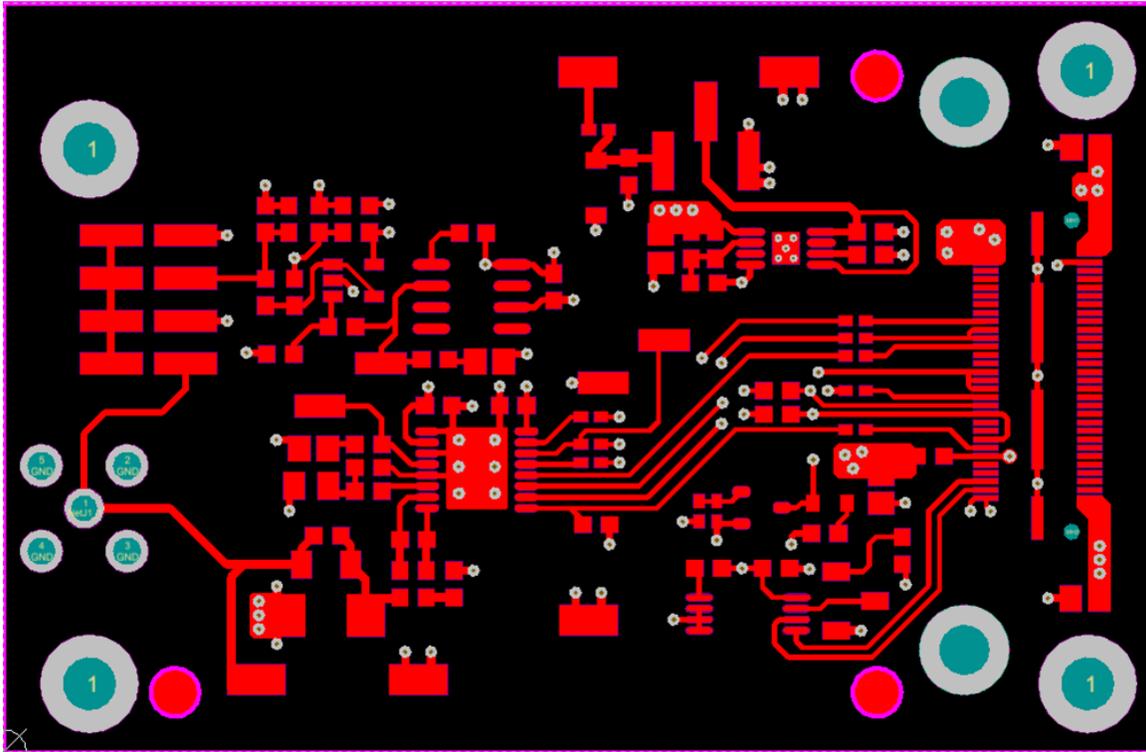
ADS8681EVM PCB Layer 1 – Top Layer
